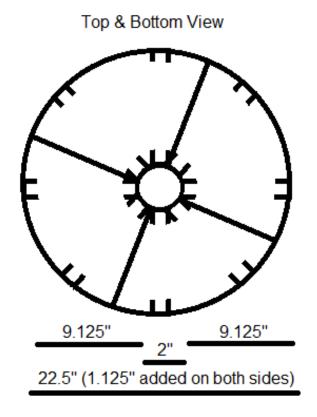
Frame Holder Top & Bottom & Side View
